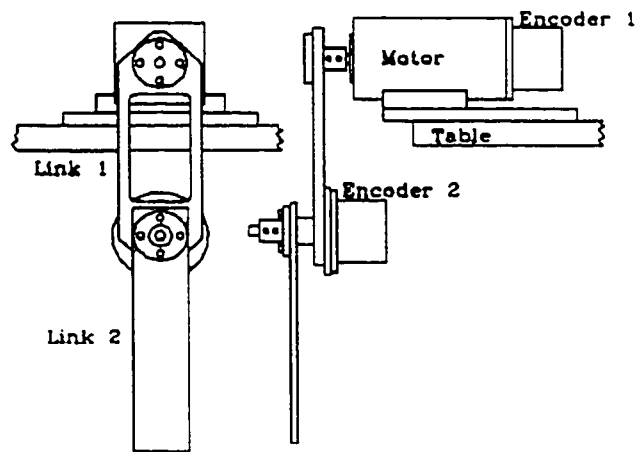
Front and Side Perspective Drawings of the Pendubot
